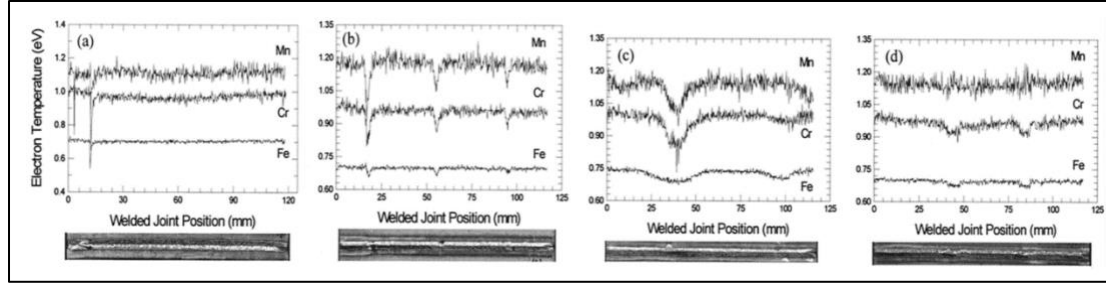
Different signals for different defects in laser welds [44].
